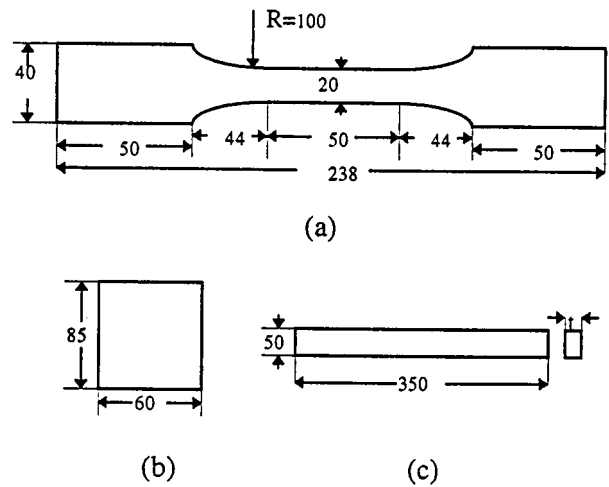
Specimen dimensions (in mm) for (a) tensile; (b) compressive; and (c) three-point bending tests.
